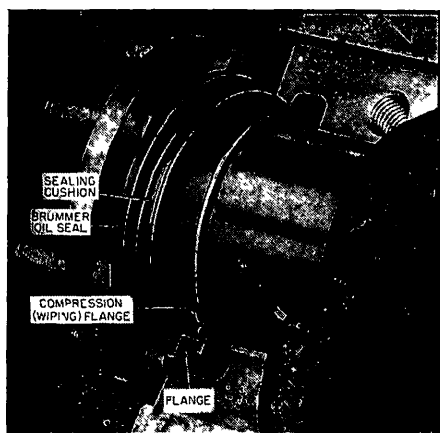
Installing crankshaft rear oil seal, 1949-52
